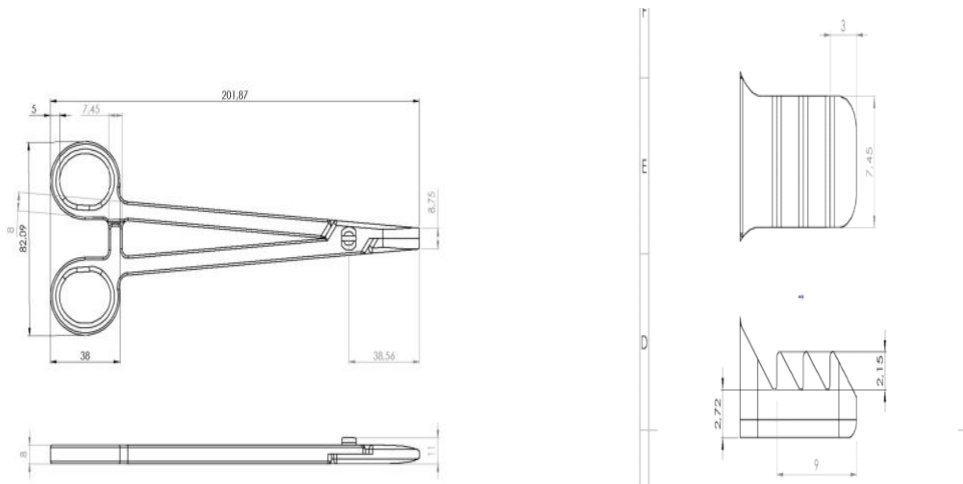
a) Technical drawing of the optimized needle holder. b) Dimensions of the optimized locking mechanism.
